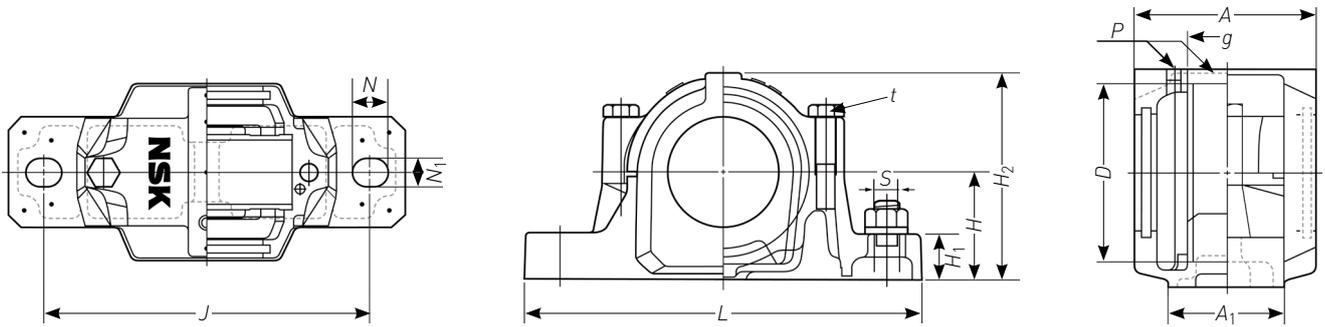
One bearing should be free to move axially. This plummer block should not be assembled with locating rings.
